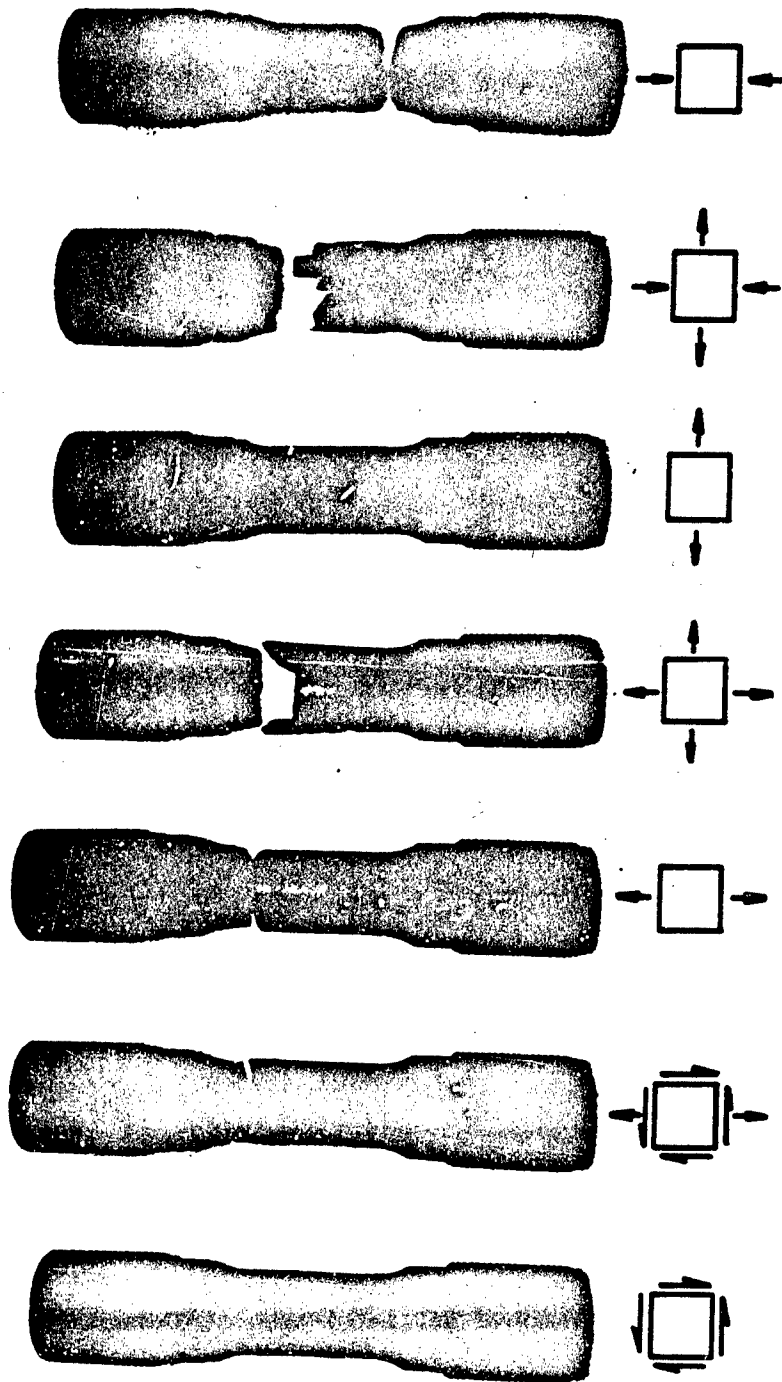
FRACTURE MODES FOR HOT-PRESSED BLOCK BERYLLIUM SPECIMENS TESTED AT 70°F
